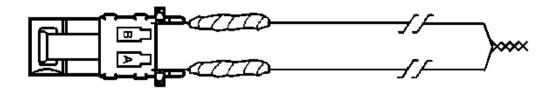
View Of Dual Insulated Connector Wires Courtesy of GENERAL MOTORS CORP.
